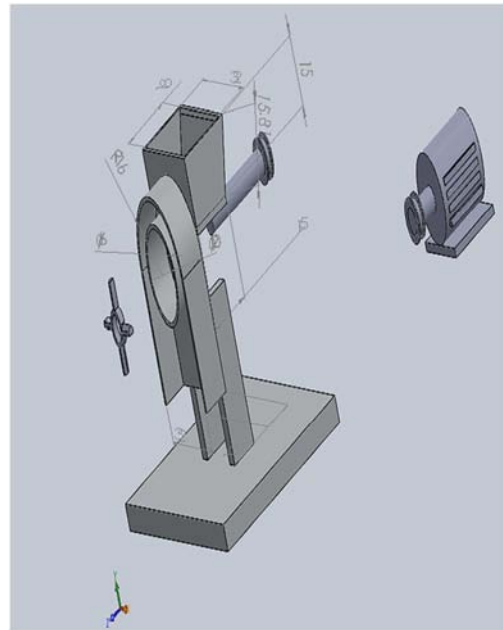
Exploded view of components. From left to right (blade, grinding chamber and hopper, shaft and pulley, motor and pulley).
